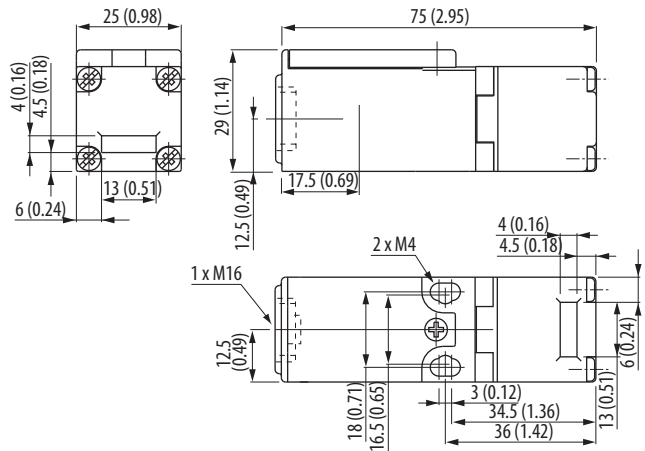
Cadet™ 3 Approximate Dimensions [mm (in.)]
